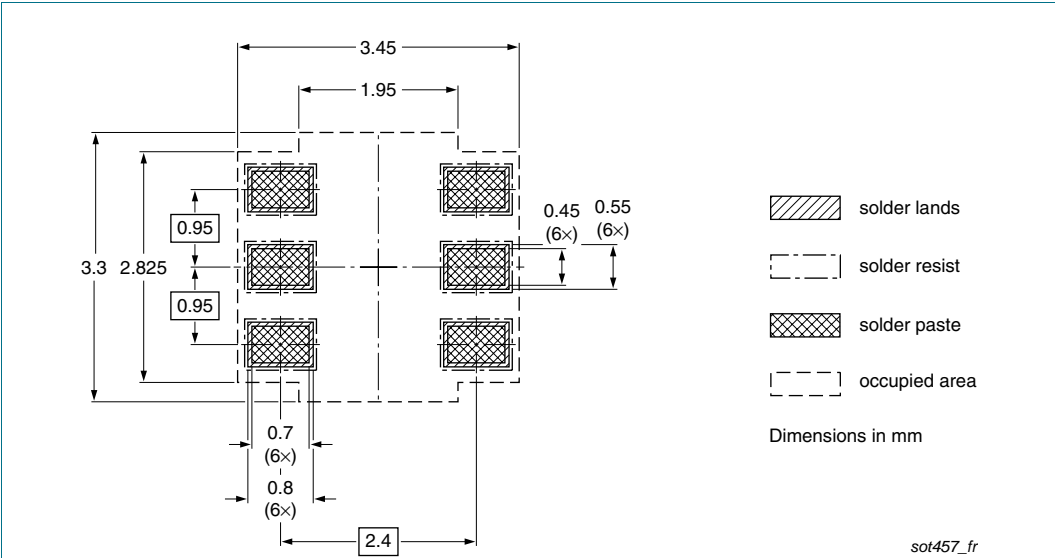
Reflow soldering footprint SOT457 (SC-74)
